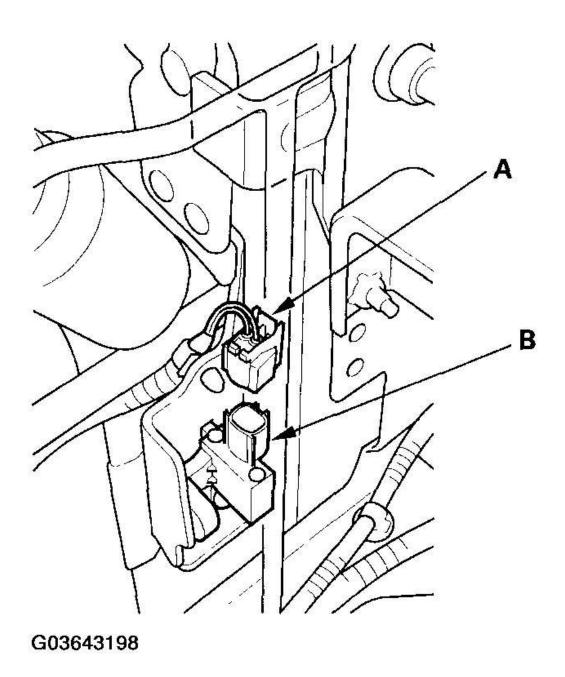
Disconnecting Driver's Seat Wire Harness 2P Connector From Driver's Seat Position Sensor
